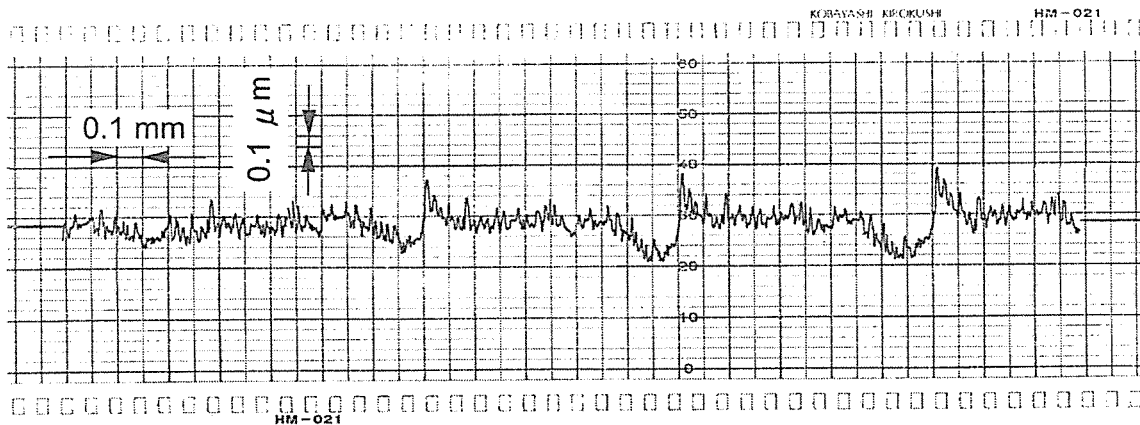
Surface roughness by facemilling (finish) of aluminum alloy
